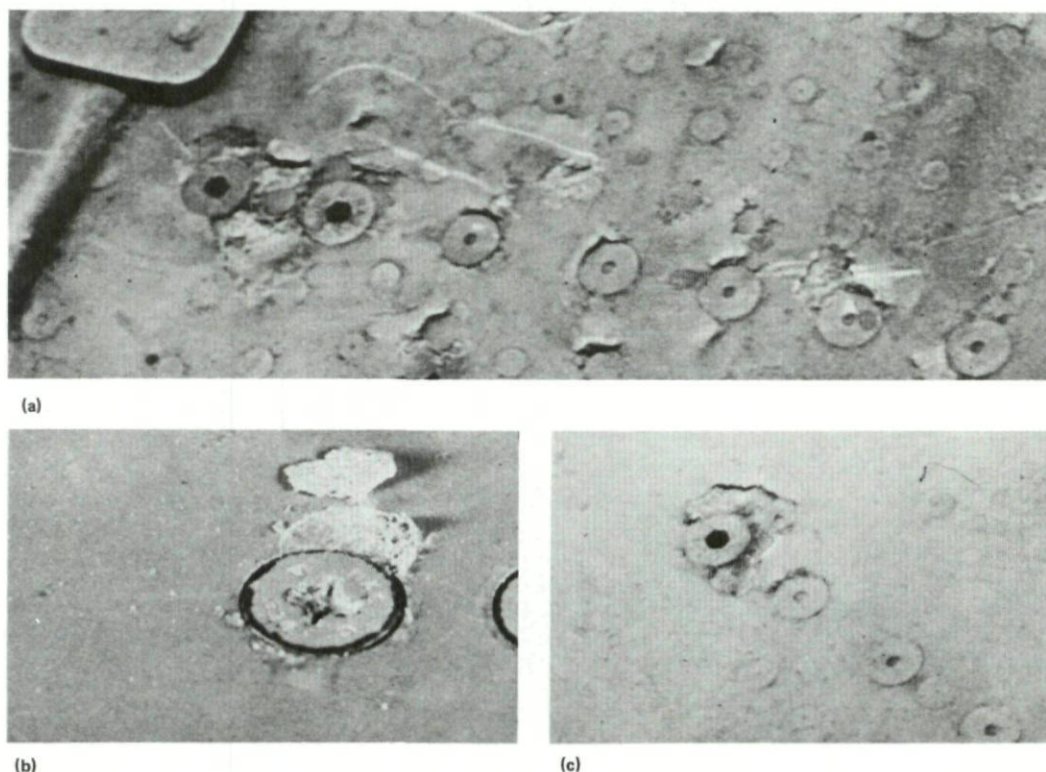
Galvanic corrosion occurring around cadmium plated steel fasteners in a 7075-T6 aluminium skin
